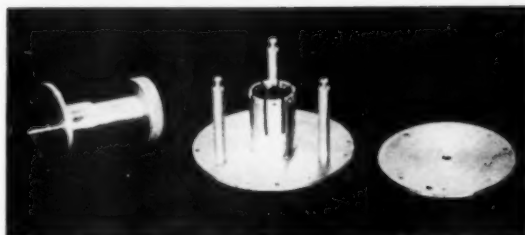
THE TANK CIRCUIT DISASSEMBLED
